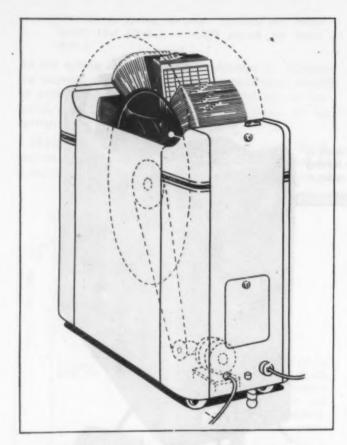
Phantom view of file showing gearmotor drive arrangement for the drum
